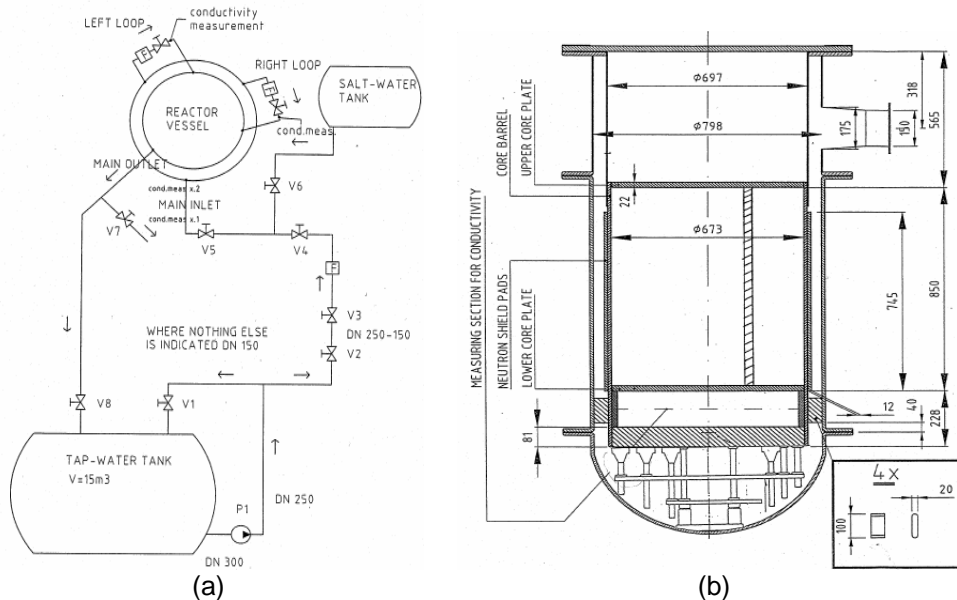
Vattenfall test facility: a) facility layout; b) RPV cross-section
